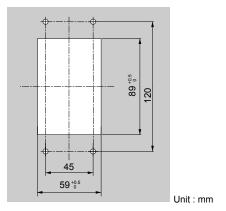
Panel Cut-Out Dimensions (Internal/Flush-Mount Installation)
